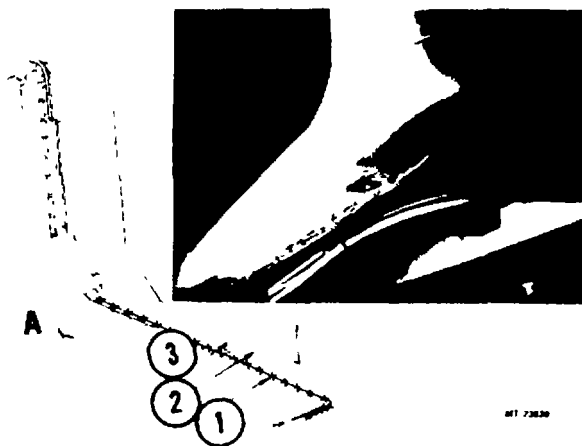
Rocker Panel to Sill-Side Inner Panel Spot Welds
